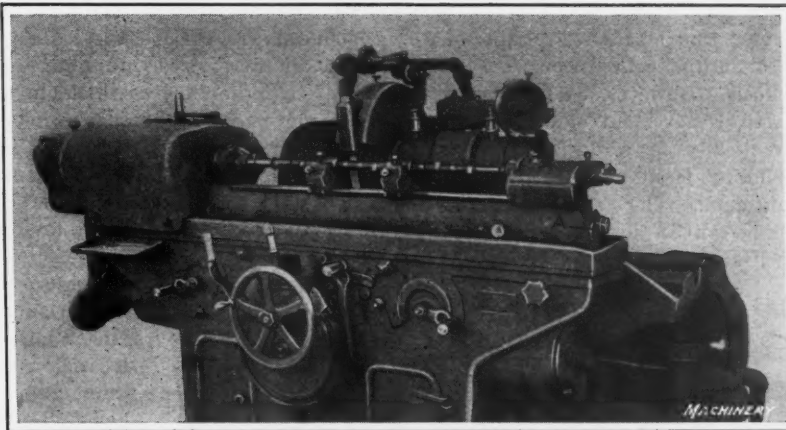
Landis 10-inch Plain Self-contained Grinding Machine provided with Attachment for grinding Automobile Camshafts
